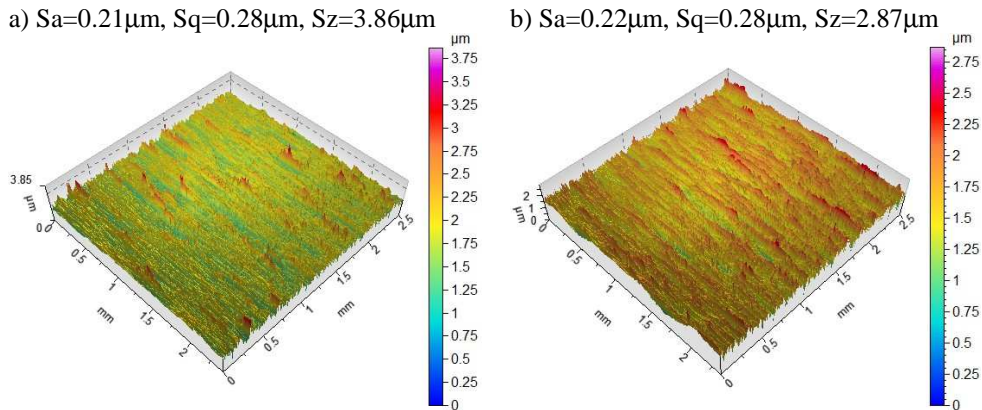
Surface textures produced by grinding using ceramic (a) and CBN (b) wheels
